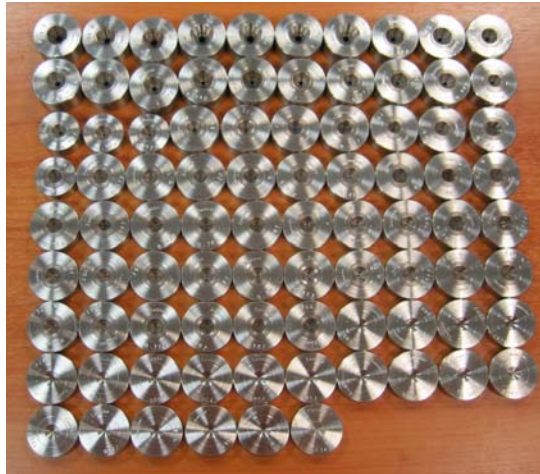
Photograph showing the 86 drawing dies used in the process.
